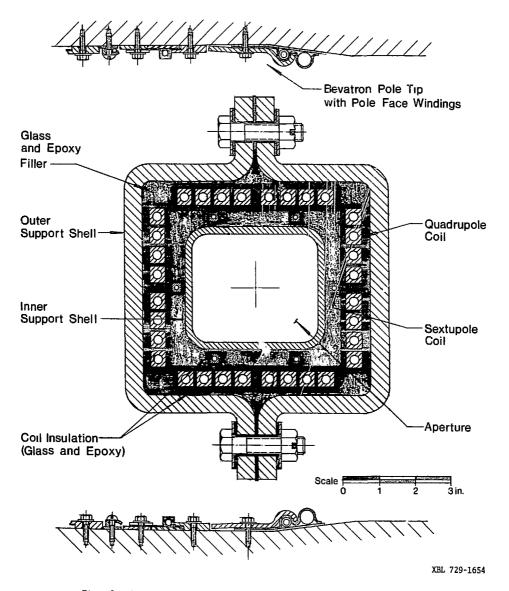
Cross-Sectional View of the Beam Extraction Focussing Coils
